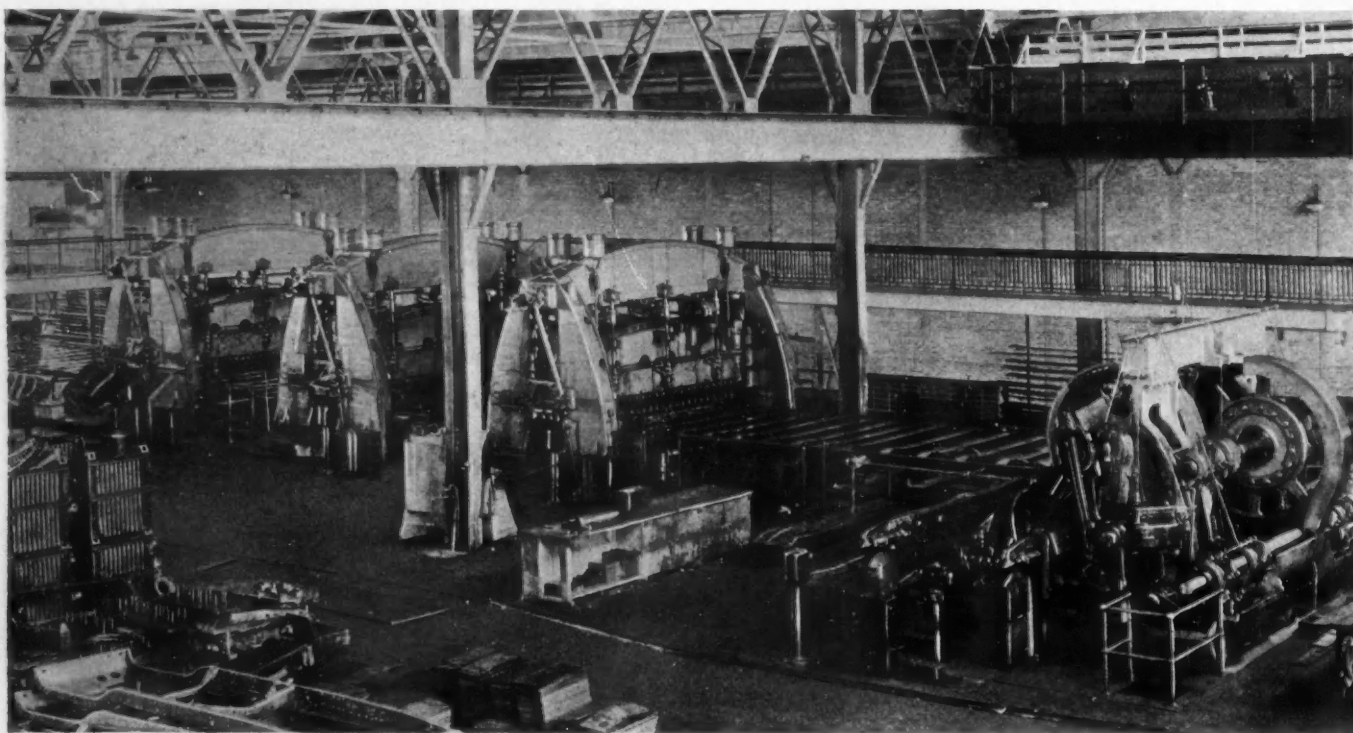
SIDE-MEMBER MANUFACTURING UNIT
